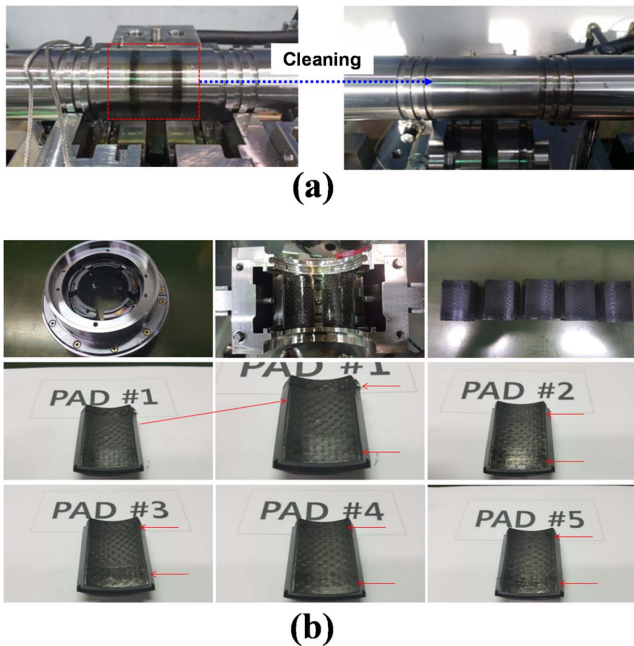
Oil cut test results : (a) rotor surface, (b) composite liner surface
